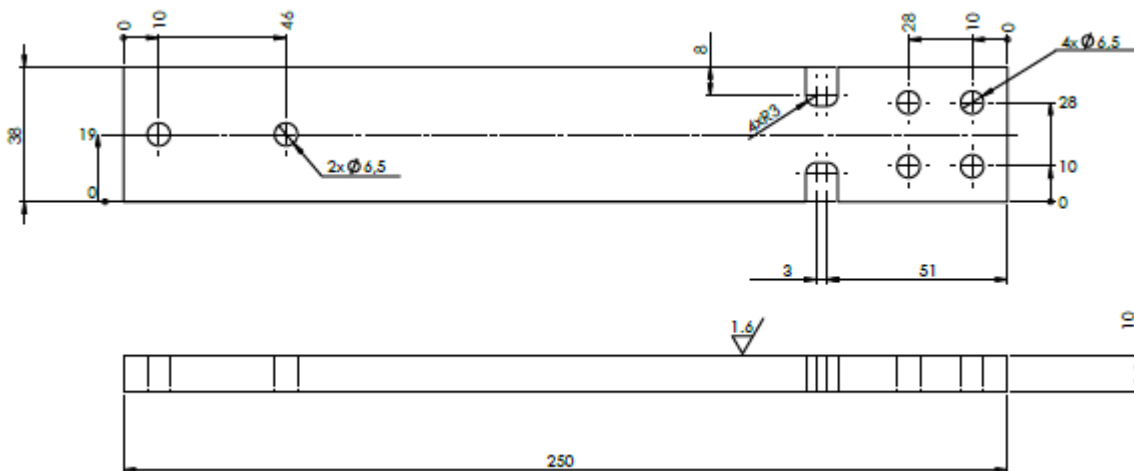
Detailed geometry of the test specimen (dimensions in mm).
